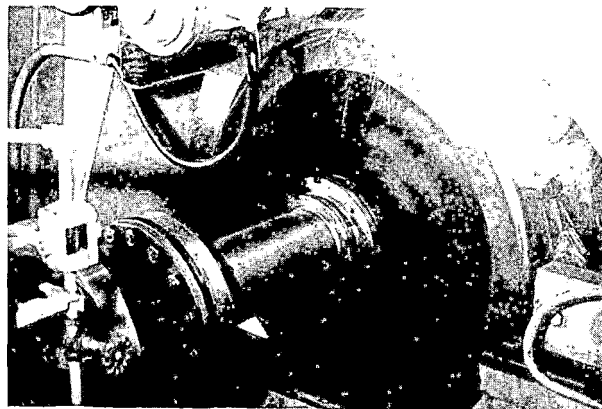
WHEEL UNDER TEST CONDITIONS
